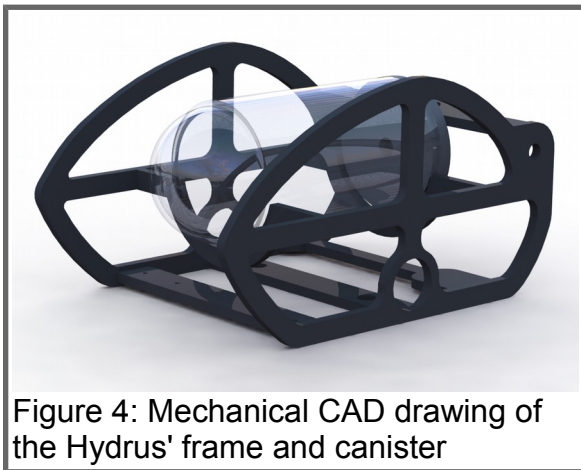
Mechanical CAD drawing of the Hydrus' frame and canister
